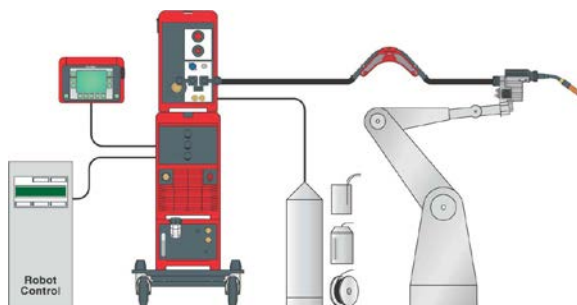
Welding System CMT equipped for automated applications (Source: Fronius)
